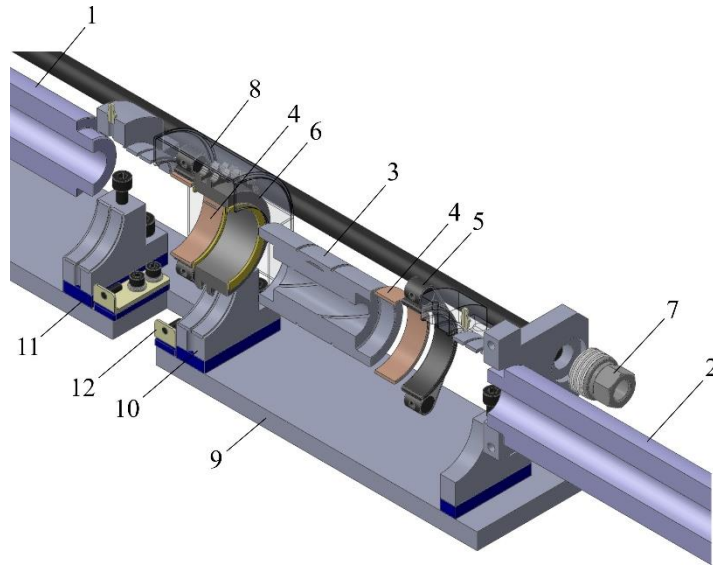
Conceptual model No 2. Longitudinal section – exploded view: 1 – initial sleeve, 2 – final sleeve, 3 – rotational barrel segment, 4 – bearing bushes, 5 – band heating elements, 6 – toothed wheel, 7 – fixing screw, 8 – casing, 9 – supporting plate, 10 – mounting of the barrel, 11 – insulator, 12 – mounting of the heating element
